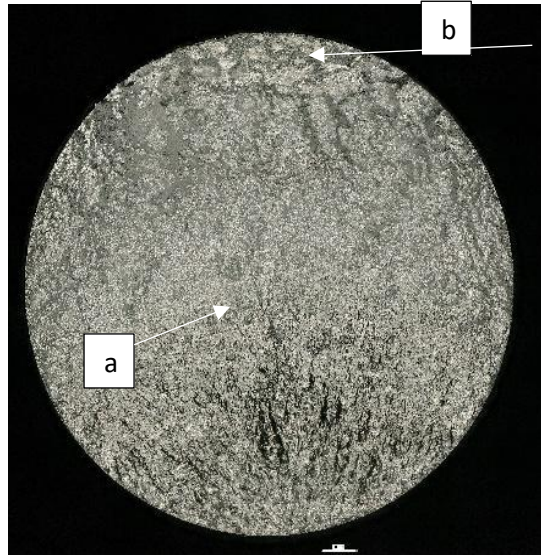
Fractured surface of aluminium – a) starting of fatigue crack; b) final breakage
